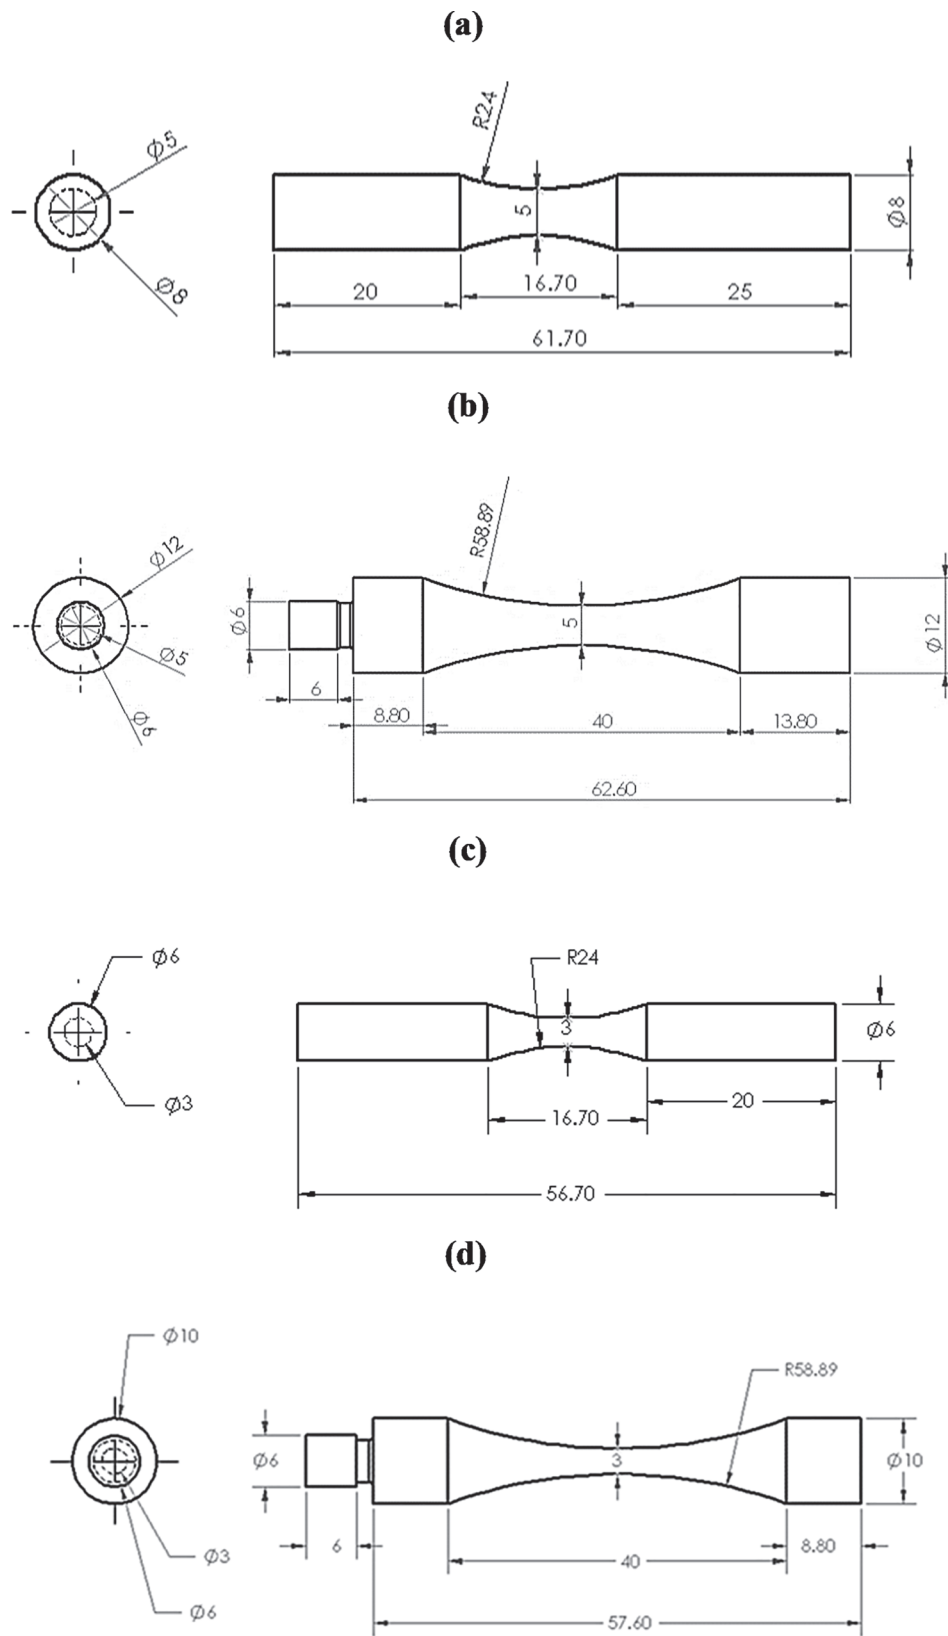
Geometries and dimensions for oversized IN718 specimens for (a) conventional and (b) ultrasonic fatigue tests. These oversized specimens were machined to the final geometries and dimensions shown in (c) for conventional and (d) for ultrasonic fatigue testing.
